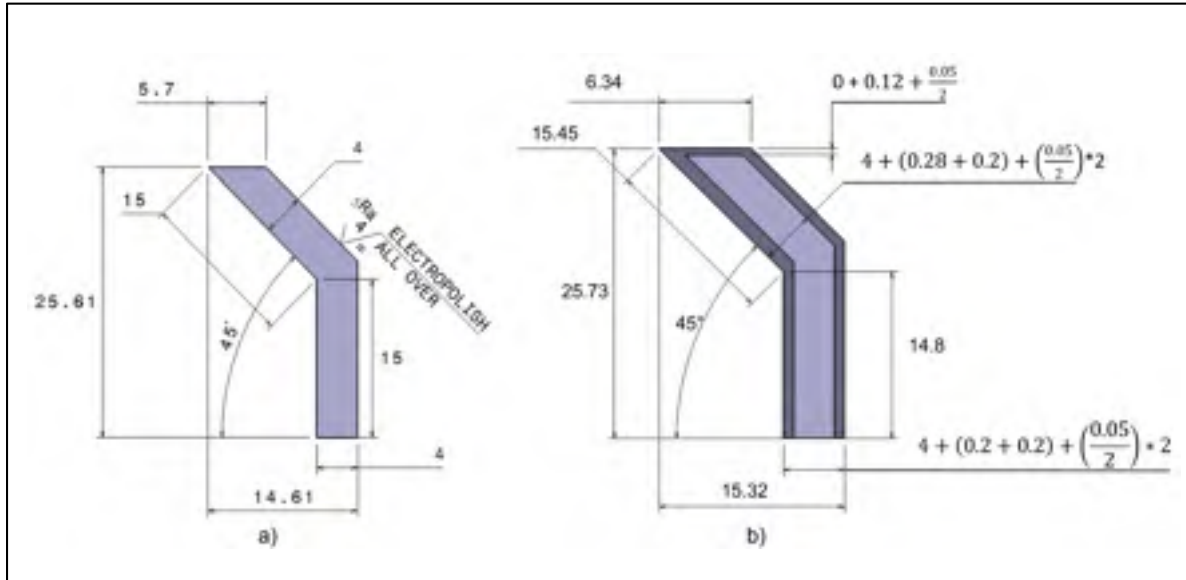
V-shaped specimen before and after EP: a) EP-specimen (nominal dimensions and roughness), b) SLM-built specimen (nominal dimensions + EP allowances + process tolerances); Dimensions are in mm and EP allowances are shown in a 5:1 scale, for better visibility
